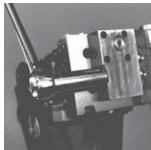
Remove H1•H2 or K1•K2 Control Solenoid
